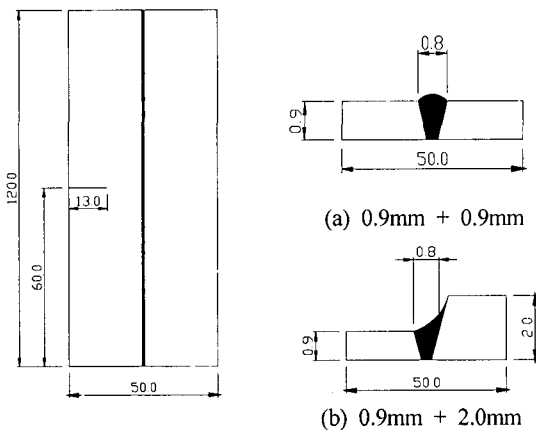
Dimension of specimen for fatigue crack propagation test
